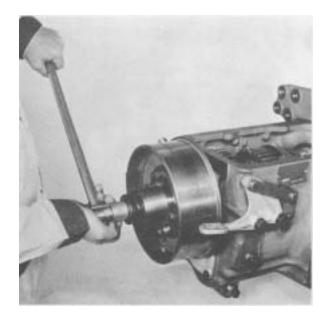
Install companion flange nut and tighten 400 to 500 ft. lbs. torque [542,3 - 610,0 N,m].
